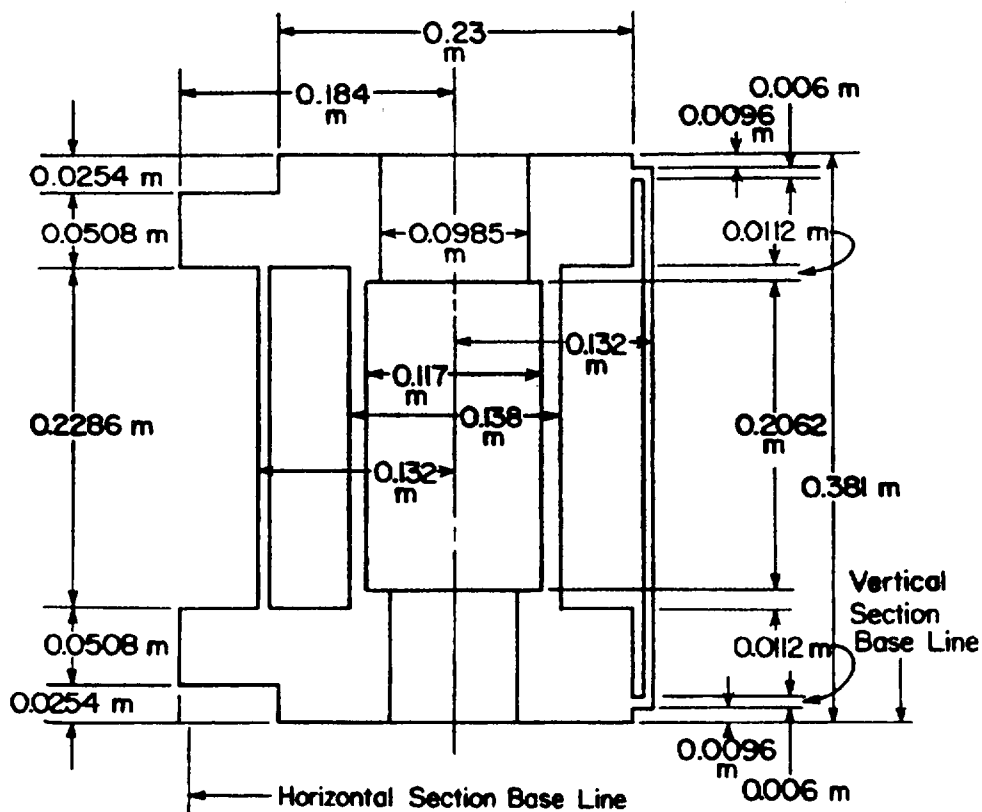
Bottom Carriage Section Properties at Section 2 (Ref. 6)
